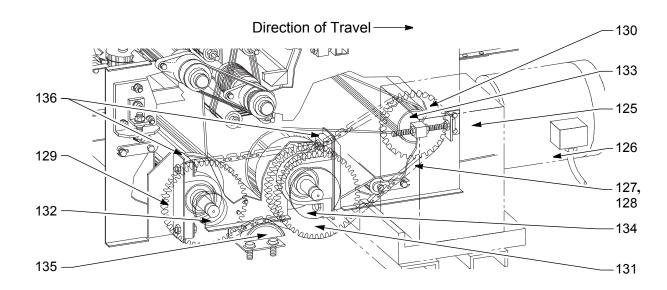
Drive Assembly, Dual Drive Diverter
